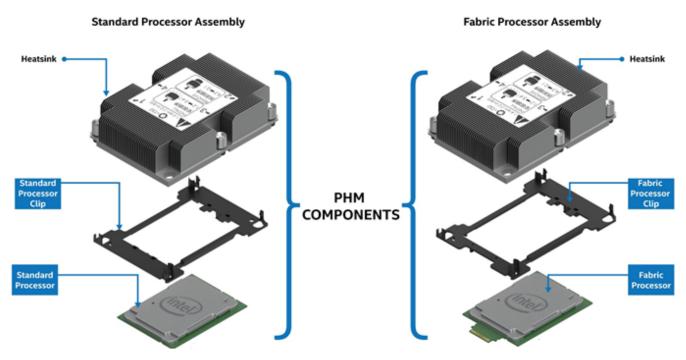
Processor Heat Sink Module (PHM) Reference Diagram
